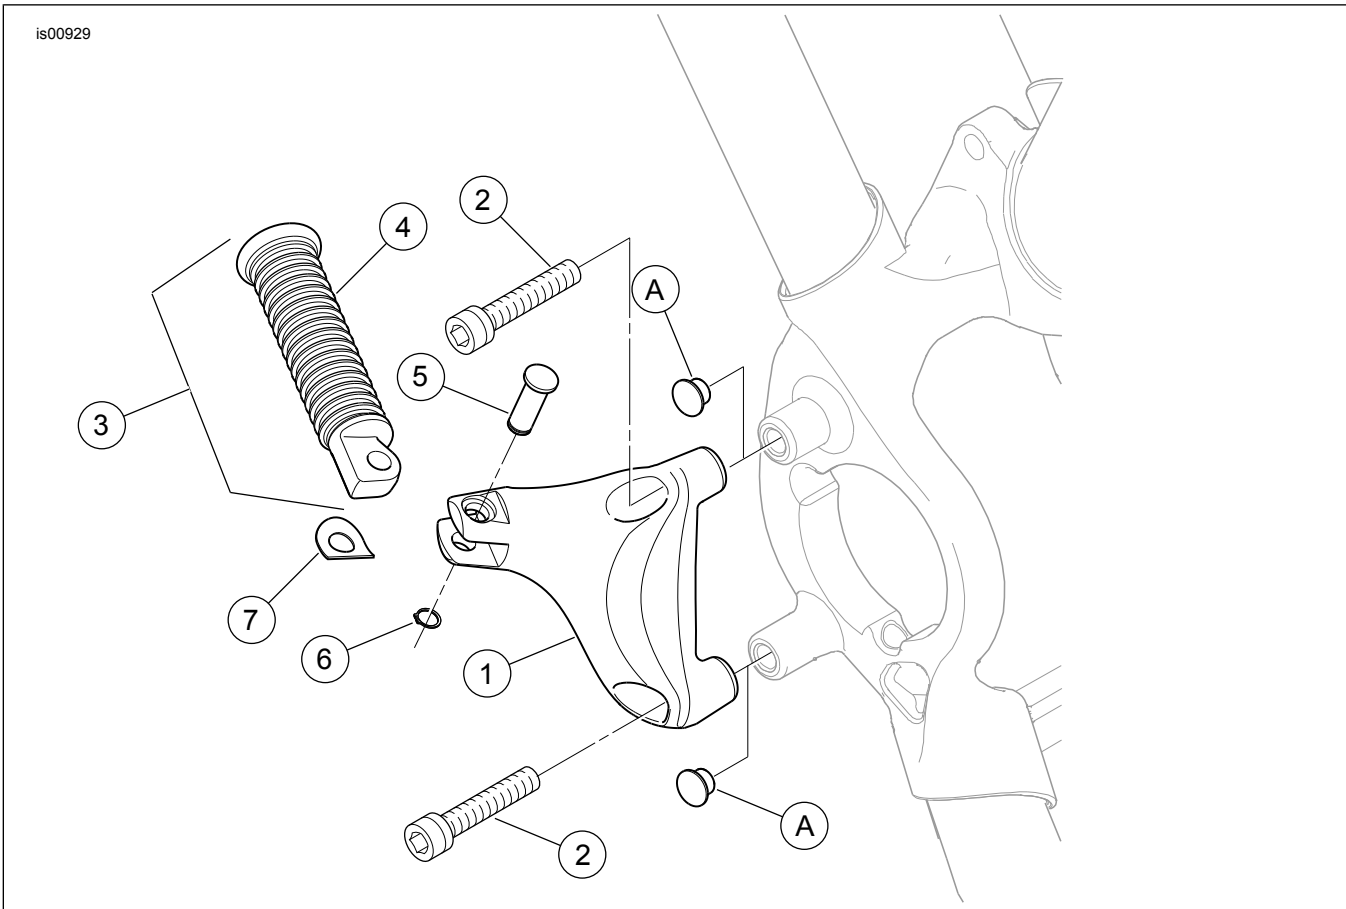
Service Parts: Passenger Footpeg Mounting Kit
